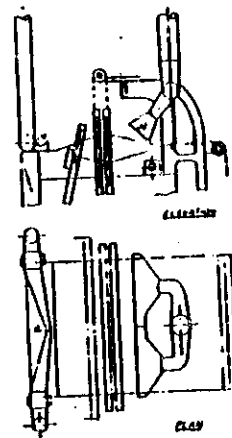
DETAIL OF EXHAUST USED ON BRITISH TYPE LOOM.
